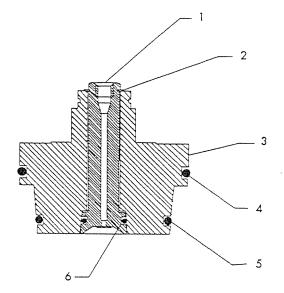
40 mm Upper Connector Assembly (P/N WAT033944)
